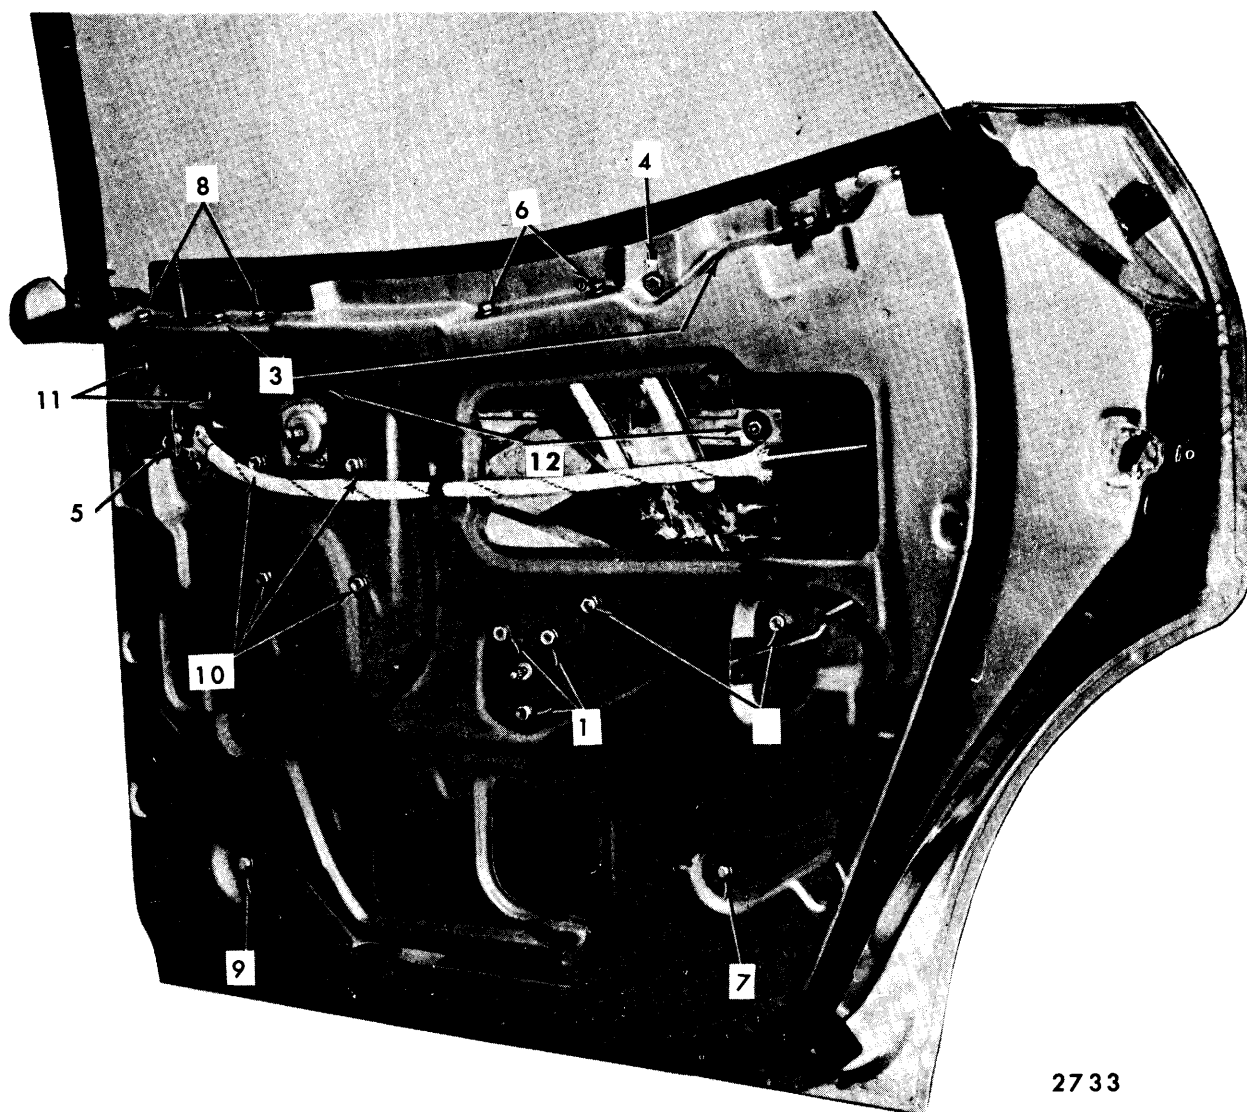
Rear Door Hardware - "A-39" Styles
